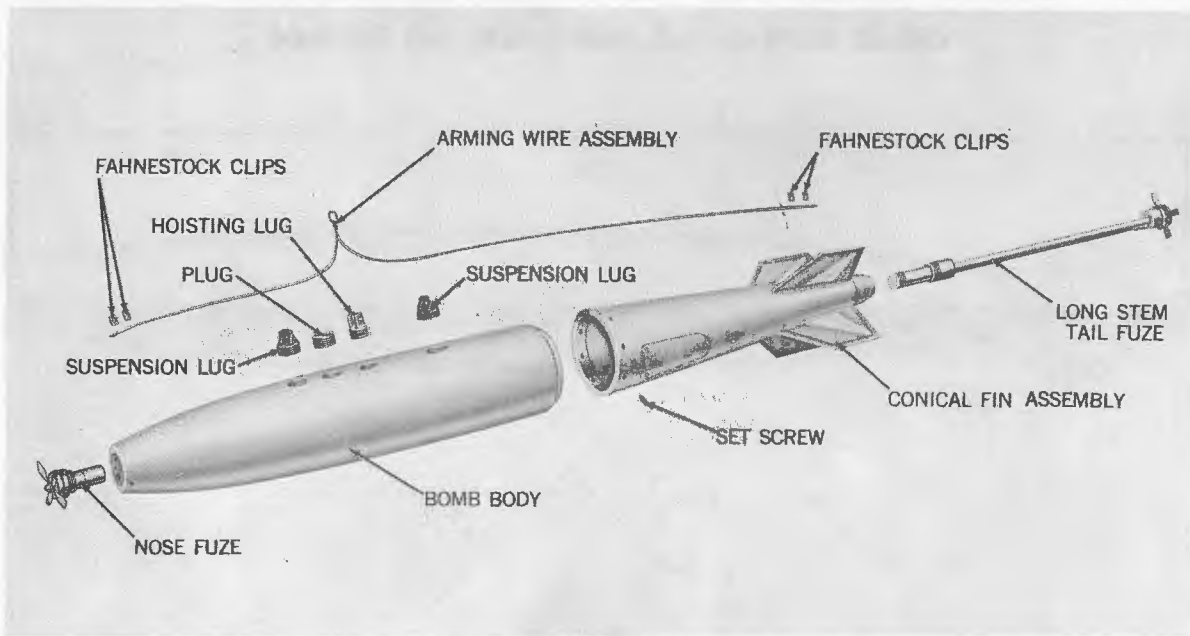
250-lb Low-Drag Bomb (GP) Mk 81 Mod 1 (Mechanically Fuzed), Exploded View.
